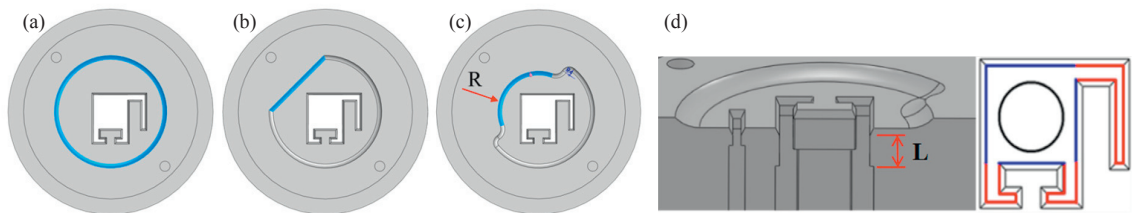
Three different types of welding chamber pocket: (a) Original type, (b) cut edge type and (c) double arc type; (d) equal type or unequal type of die bearing length.
